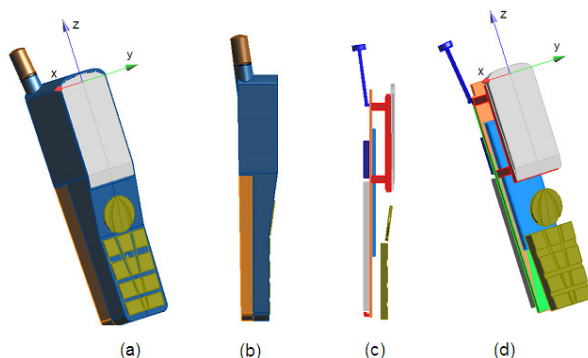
Numerical components structure of the handset; (a) A 3-D view, (b) A side-view, (c) A side-view without housing and covers and (d) A 3-D view without housing and covers.
